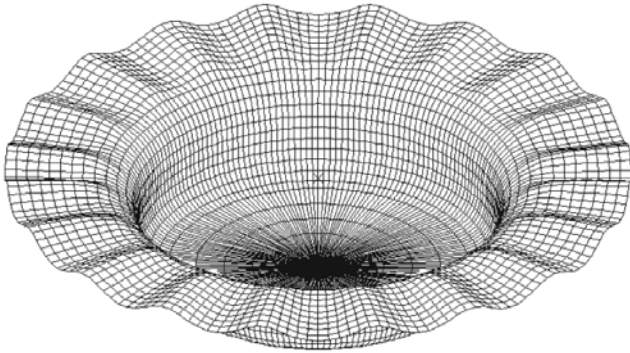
Wrinkling in sheet metal deep drawing [5]
